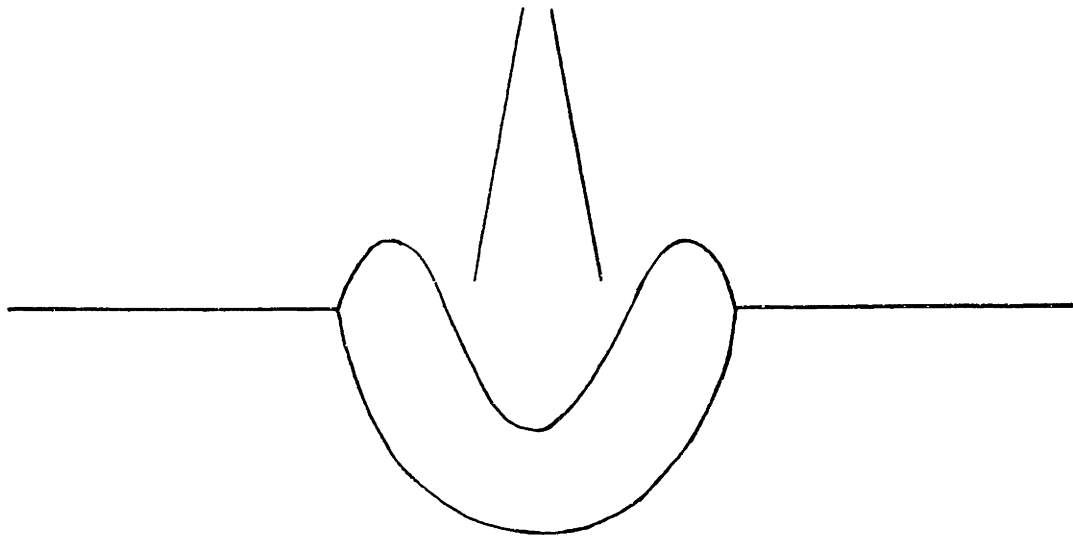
Delivery of heat to pool sides in a depressed weld pool.
